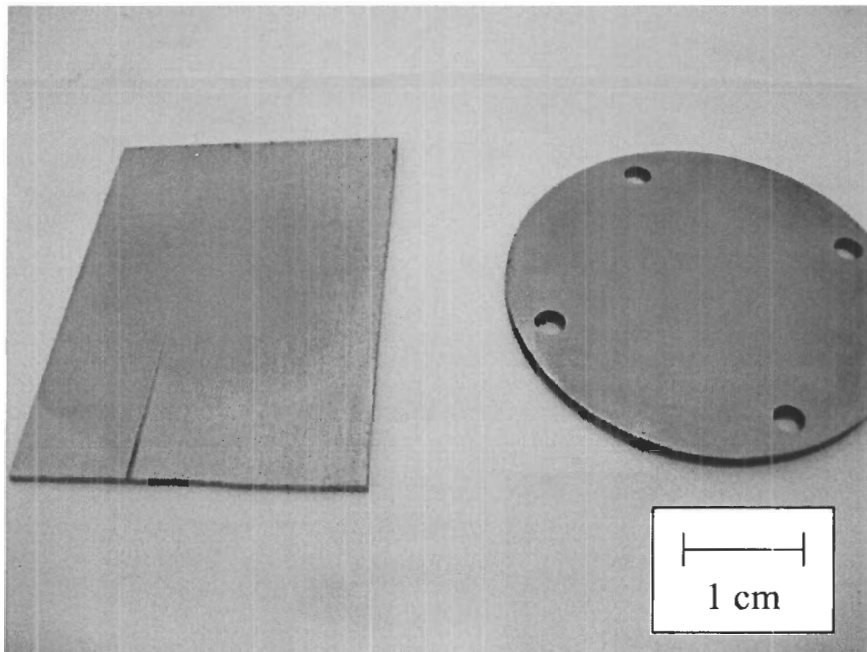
Primer Coated EFC Test Damper Mounting Plates
